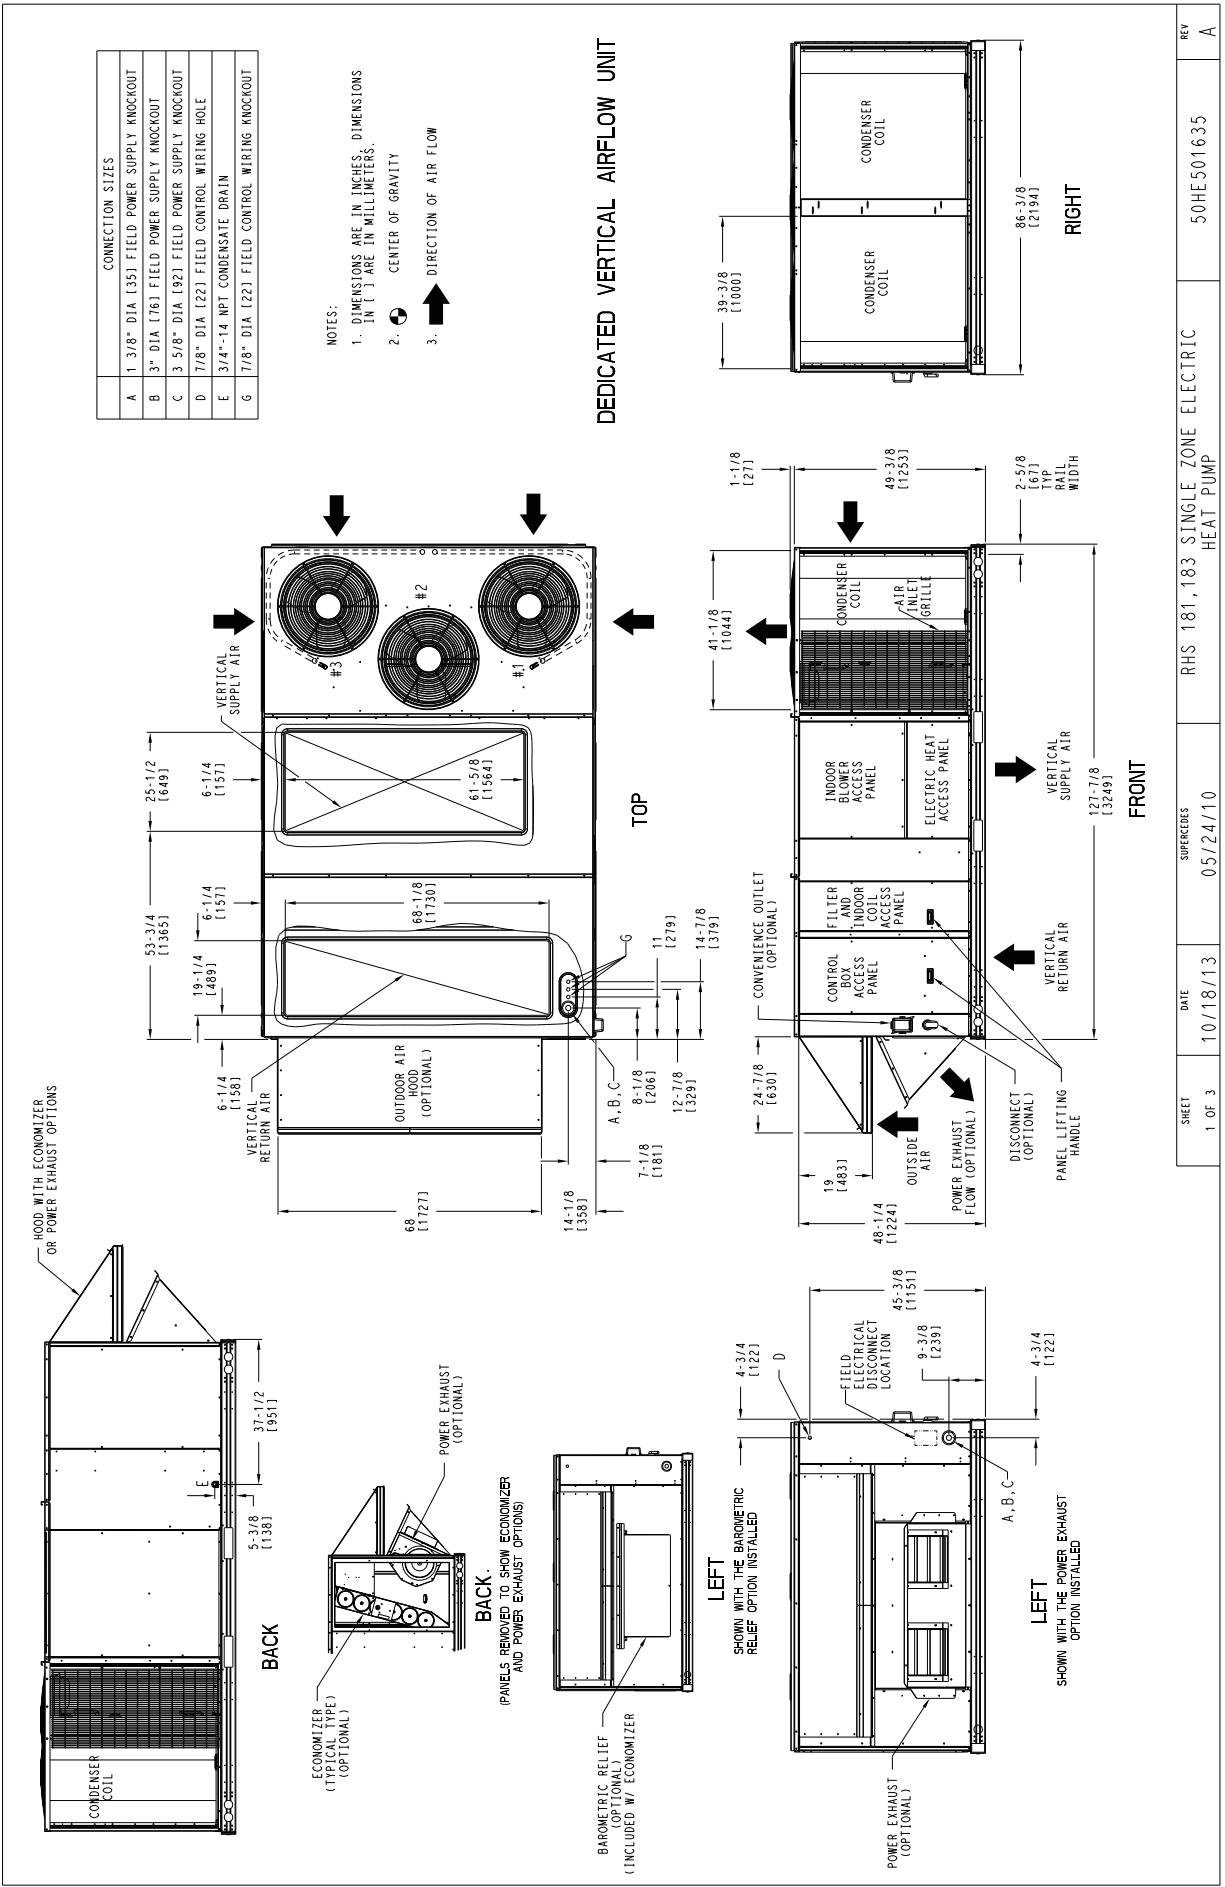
RHS181-183 Unit Dimensional Drawing
